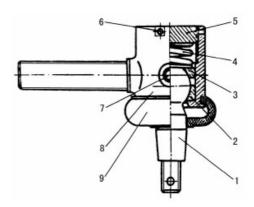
2WD fore acle assembly 1-ball-head pin 2-ball-head pin seat 3-pin cap4-pressing spring 5screw cover 6-lock bolt 7-grease nipple 8-pull rod connector 9-oil seal of connector
